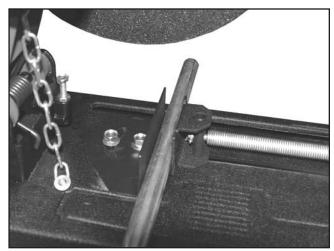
Example photo of workpiece held firmly between the vise jaws.
